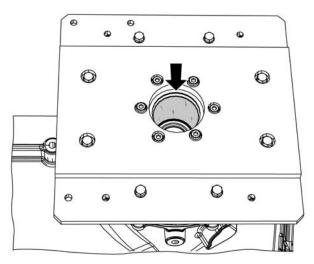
Greasing and cleaning the inside-cone cast-resin socket
